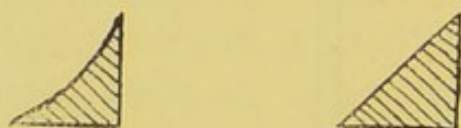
WOODEN FILLETS IN CROSS SECTION.
